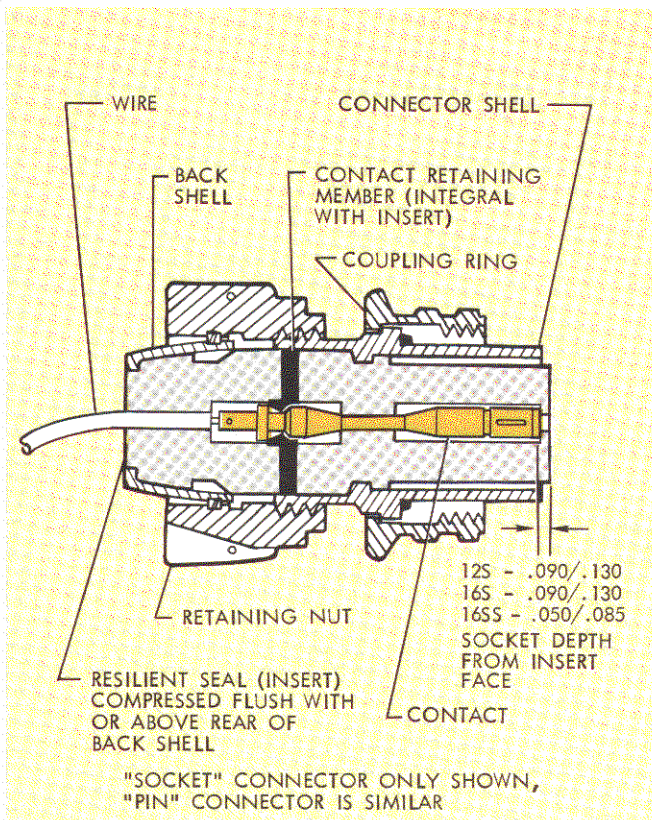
Cutaway Drawing of Typical Amphenol "69" Connector
